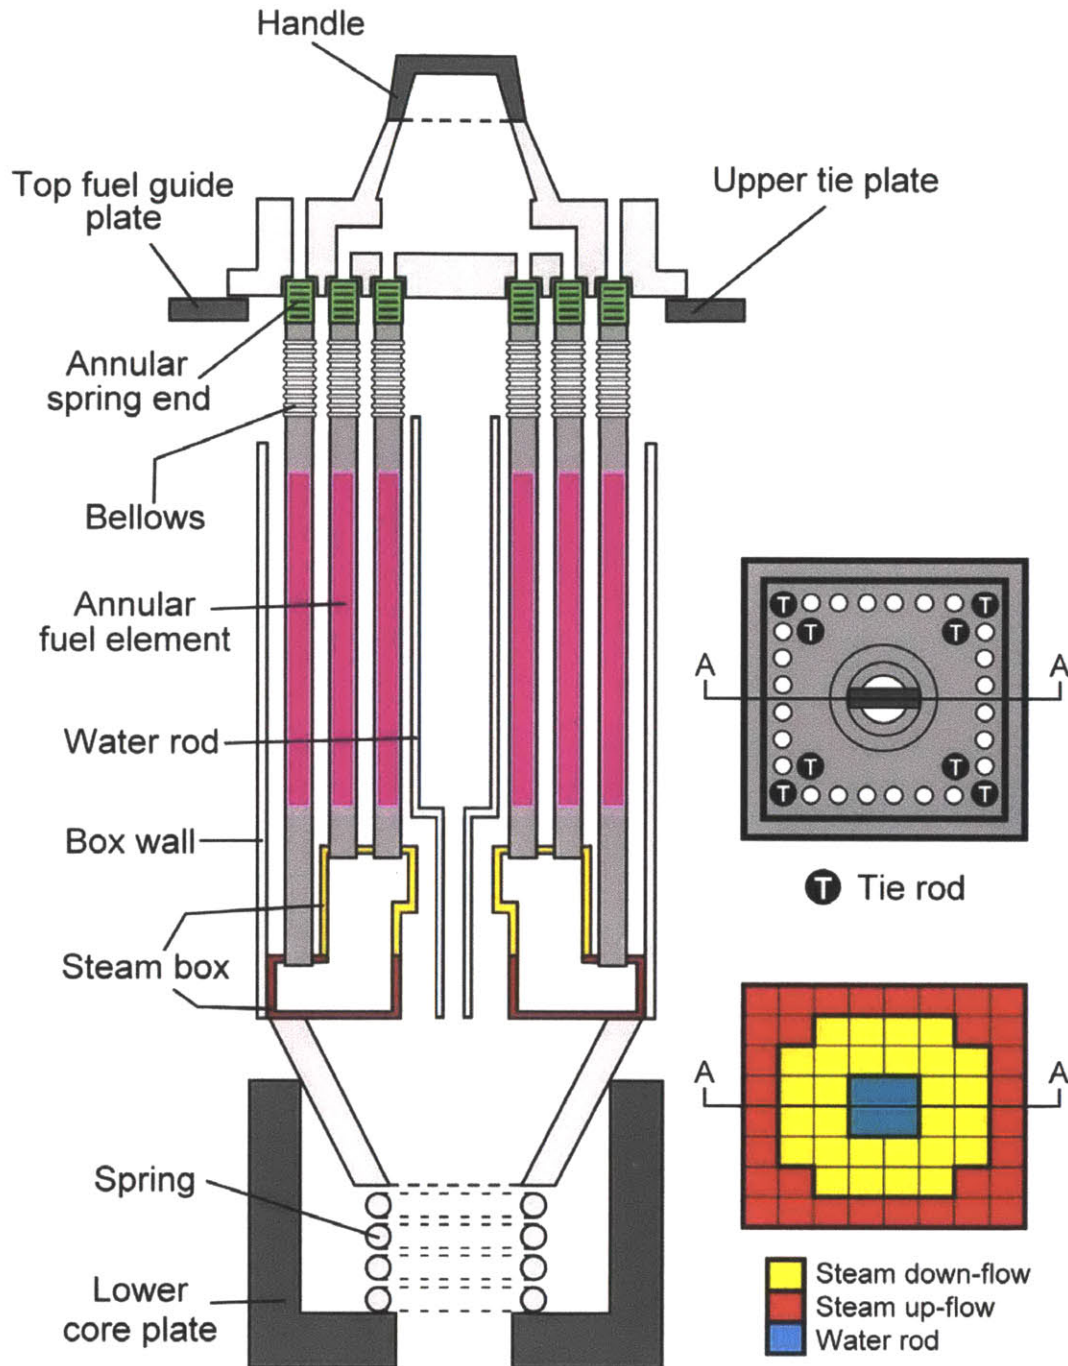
Cross-sectional view of the ASBWR fuel assembly (A-A)
